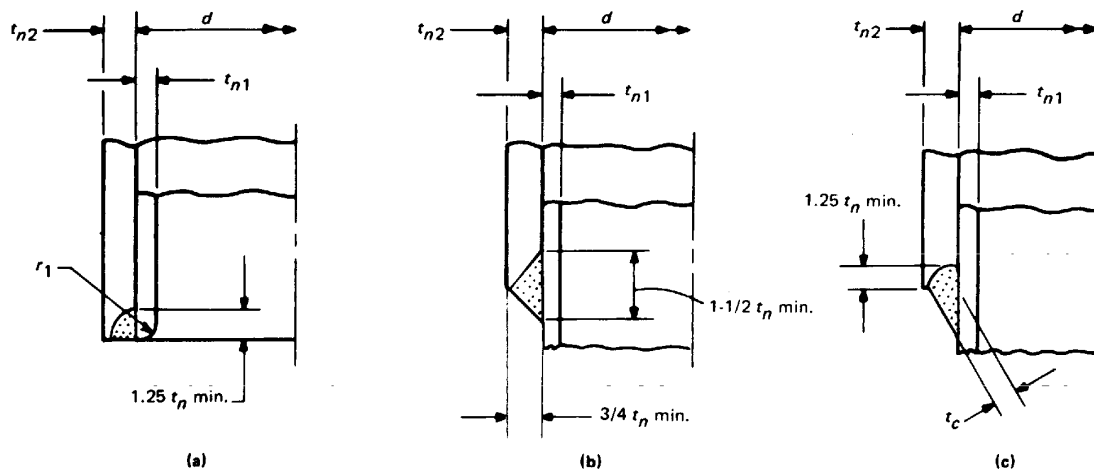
(d)-3 PARTIAL PENETRATION WELD CONNECTIONS FOR COAXIAL CYLINDERS
